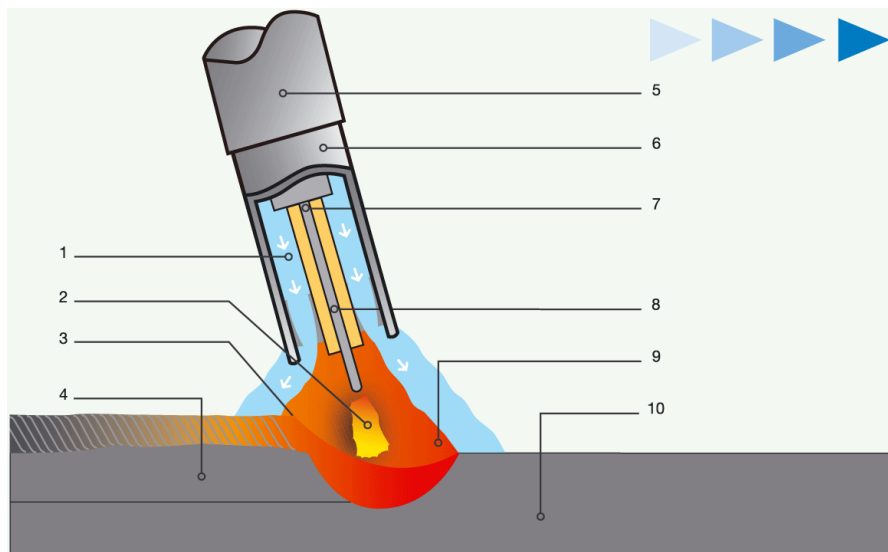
MIG/MAG welding (WMB, 2009) : 1.Shielding gas, 2.Electric arc, 3.Weld pool, 4.Solidified weld metal, 5.Welding torch, 6.Gas nozzle, 7.Wire feed, 8.Welding wire(solid or flux-cored), 9.Protective atmosphere, 10.Base material.
